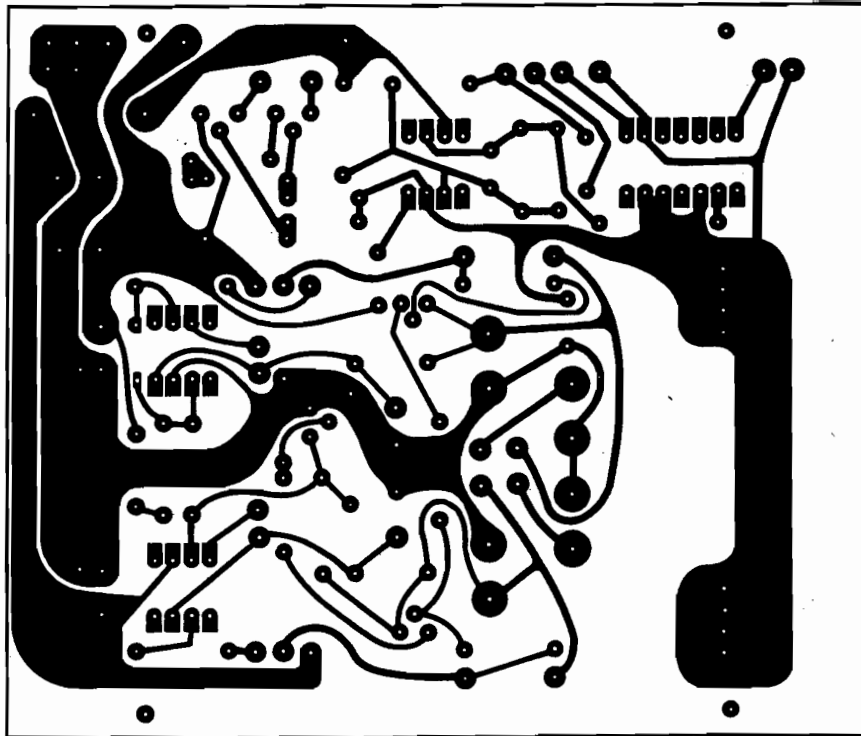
Mark II p.s.u. p.c.b. incorporating reference supply and hold isolator
